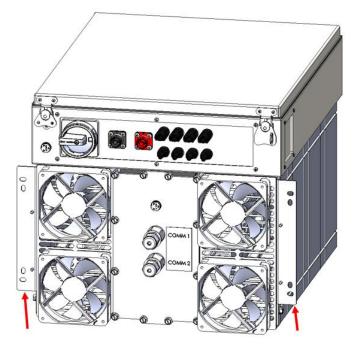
SPOT/BOSS WITH FEED AND MOUNTING BRACKETS
